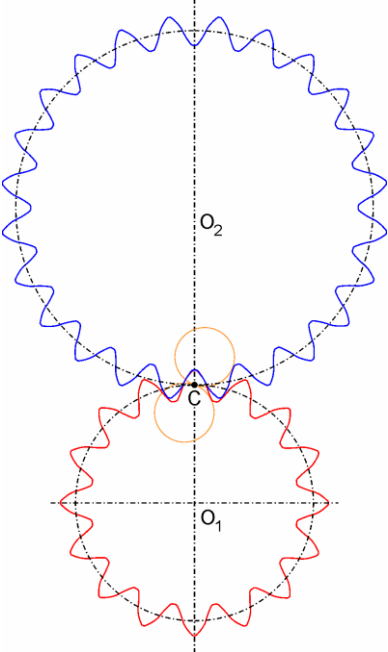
Geometrical model of the gear pair with cycloidal teeth flanks
